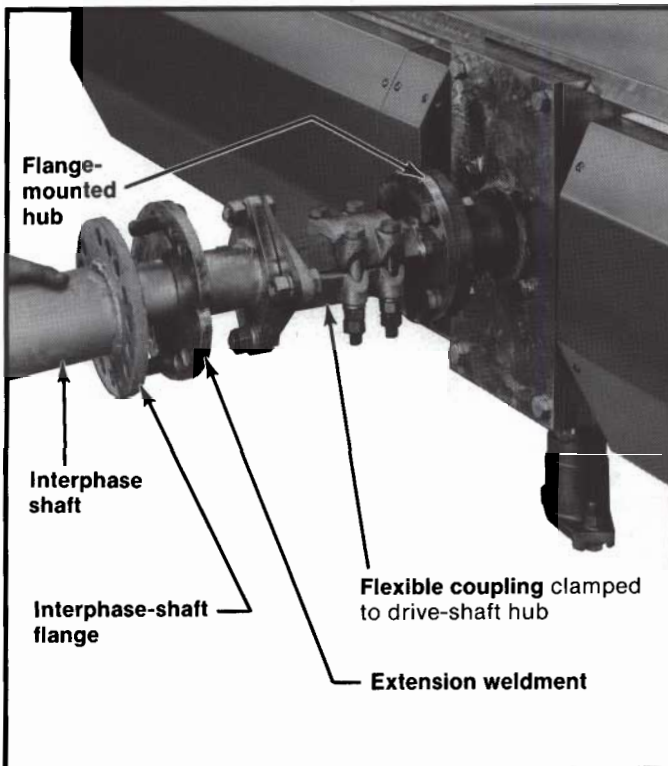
Interphase-shaft coupling detail, typical of center pole-unit.
